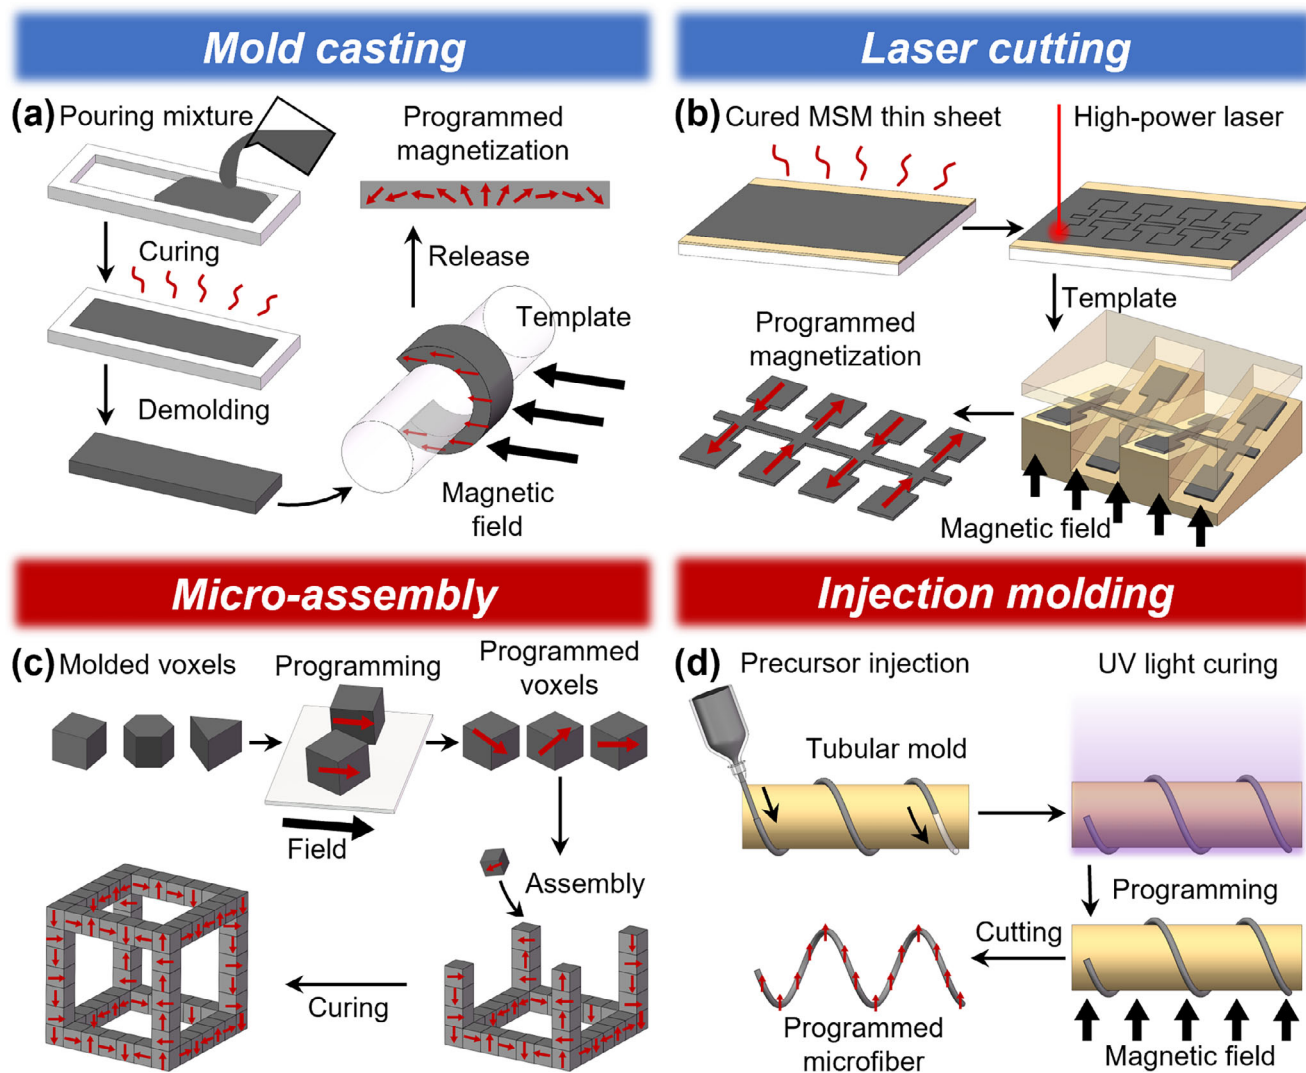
| Traditional approaches for manufacturing MSM structures, including (a) mold casting, (b) laser cutting, (c) micro-assembly, and (d) injection molding.
